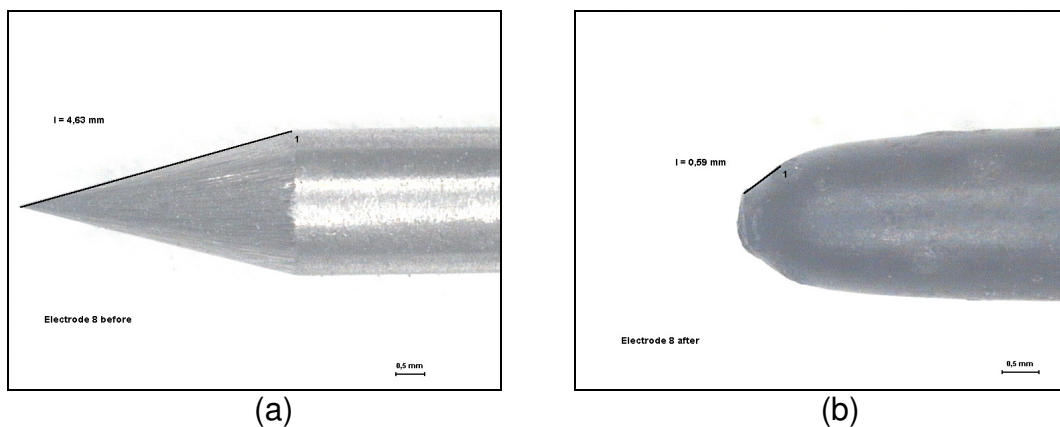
Electrode 8 used for experiment number 8: (a) before welding; (b) after welding.
